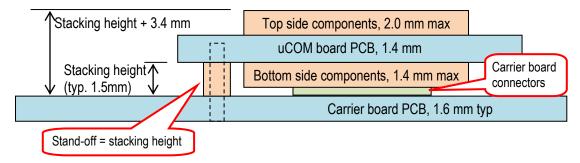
uCOM Board Mounting on Carrier Board, Stacking Height
